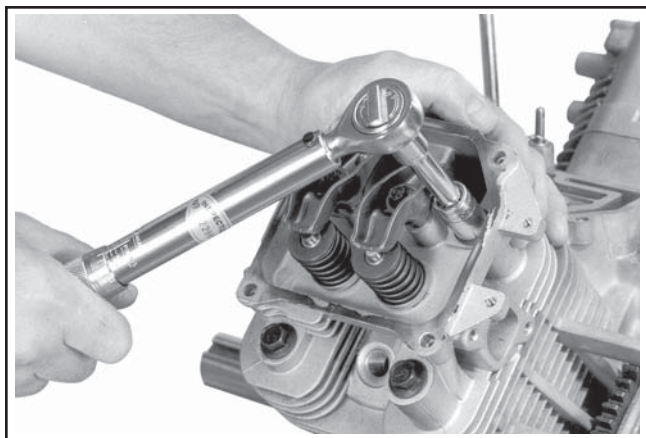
Torquing the Cylinder Head Mounting Nuts (Stud Design).
